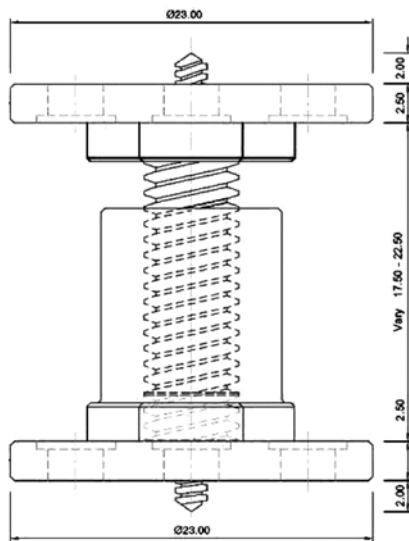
The geometry of KKU expandable cage (in millimeters)
